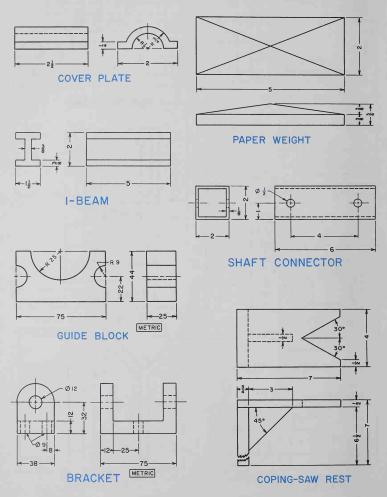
(Continued.) Additional problems for isometric or oblique drawing.
